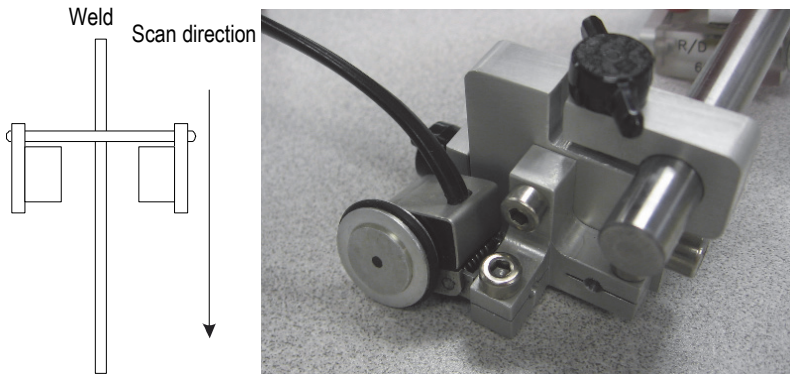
The Mini-Wheel encoder installed on the outside of the encoder holder
